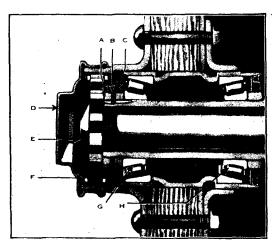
Sectional view of rear wheel hub, showing bearings
